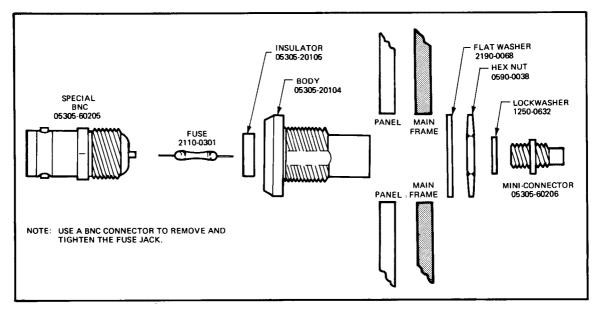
Details of Input Connector J1 and Fuse Mounting
